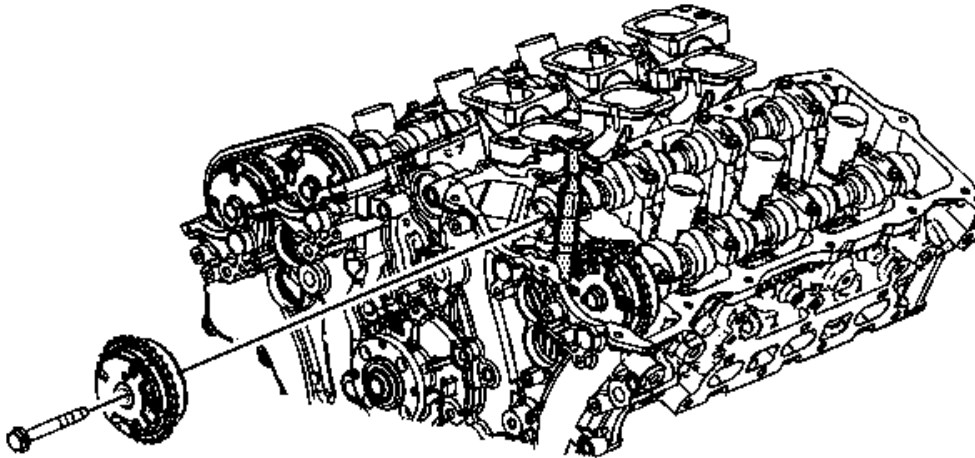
Exhaust Camshaft Position Actuator & Bolt
